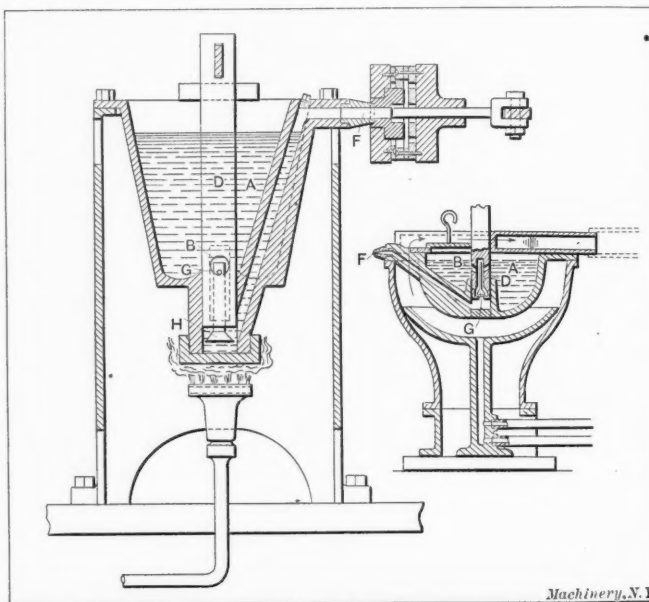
Die-casting Machine patented in 1892. Fig. 6. Improvement made in 1888 on Machine shown in Figs 1 and 2
